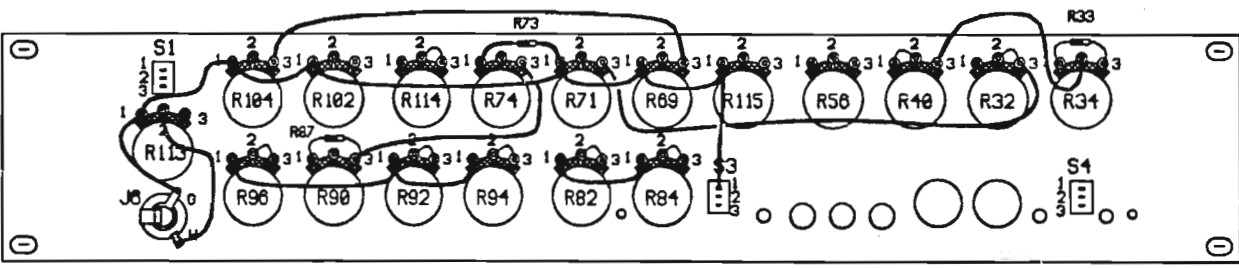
This point-to-point wiring of the front panel mounted parts will be easier if done before the circuit board is mounted. Note fixed resistors R33, R87 and R73 (with sleeving) which mount on pot lugs.
